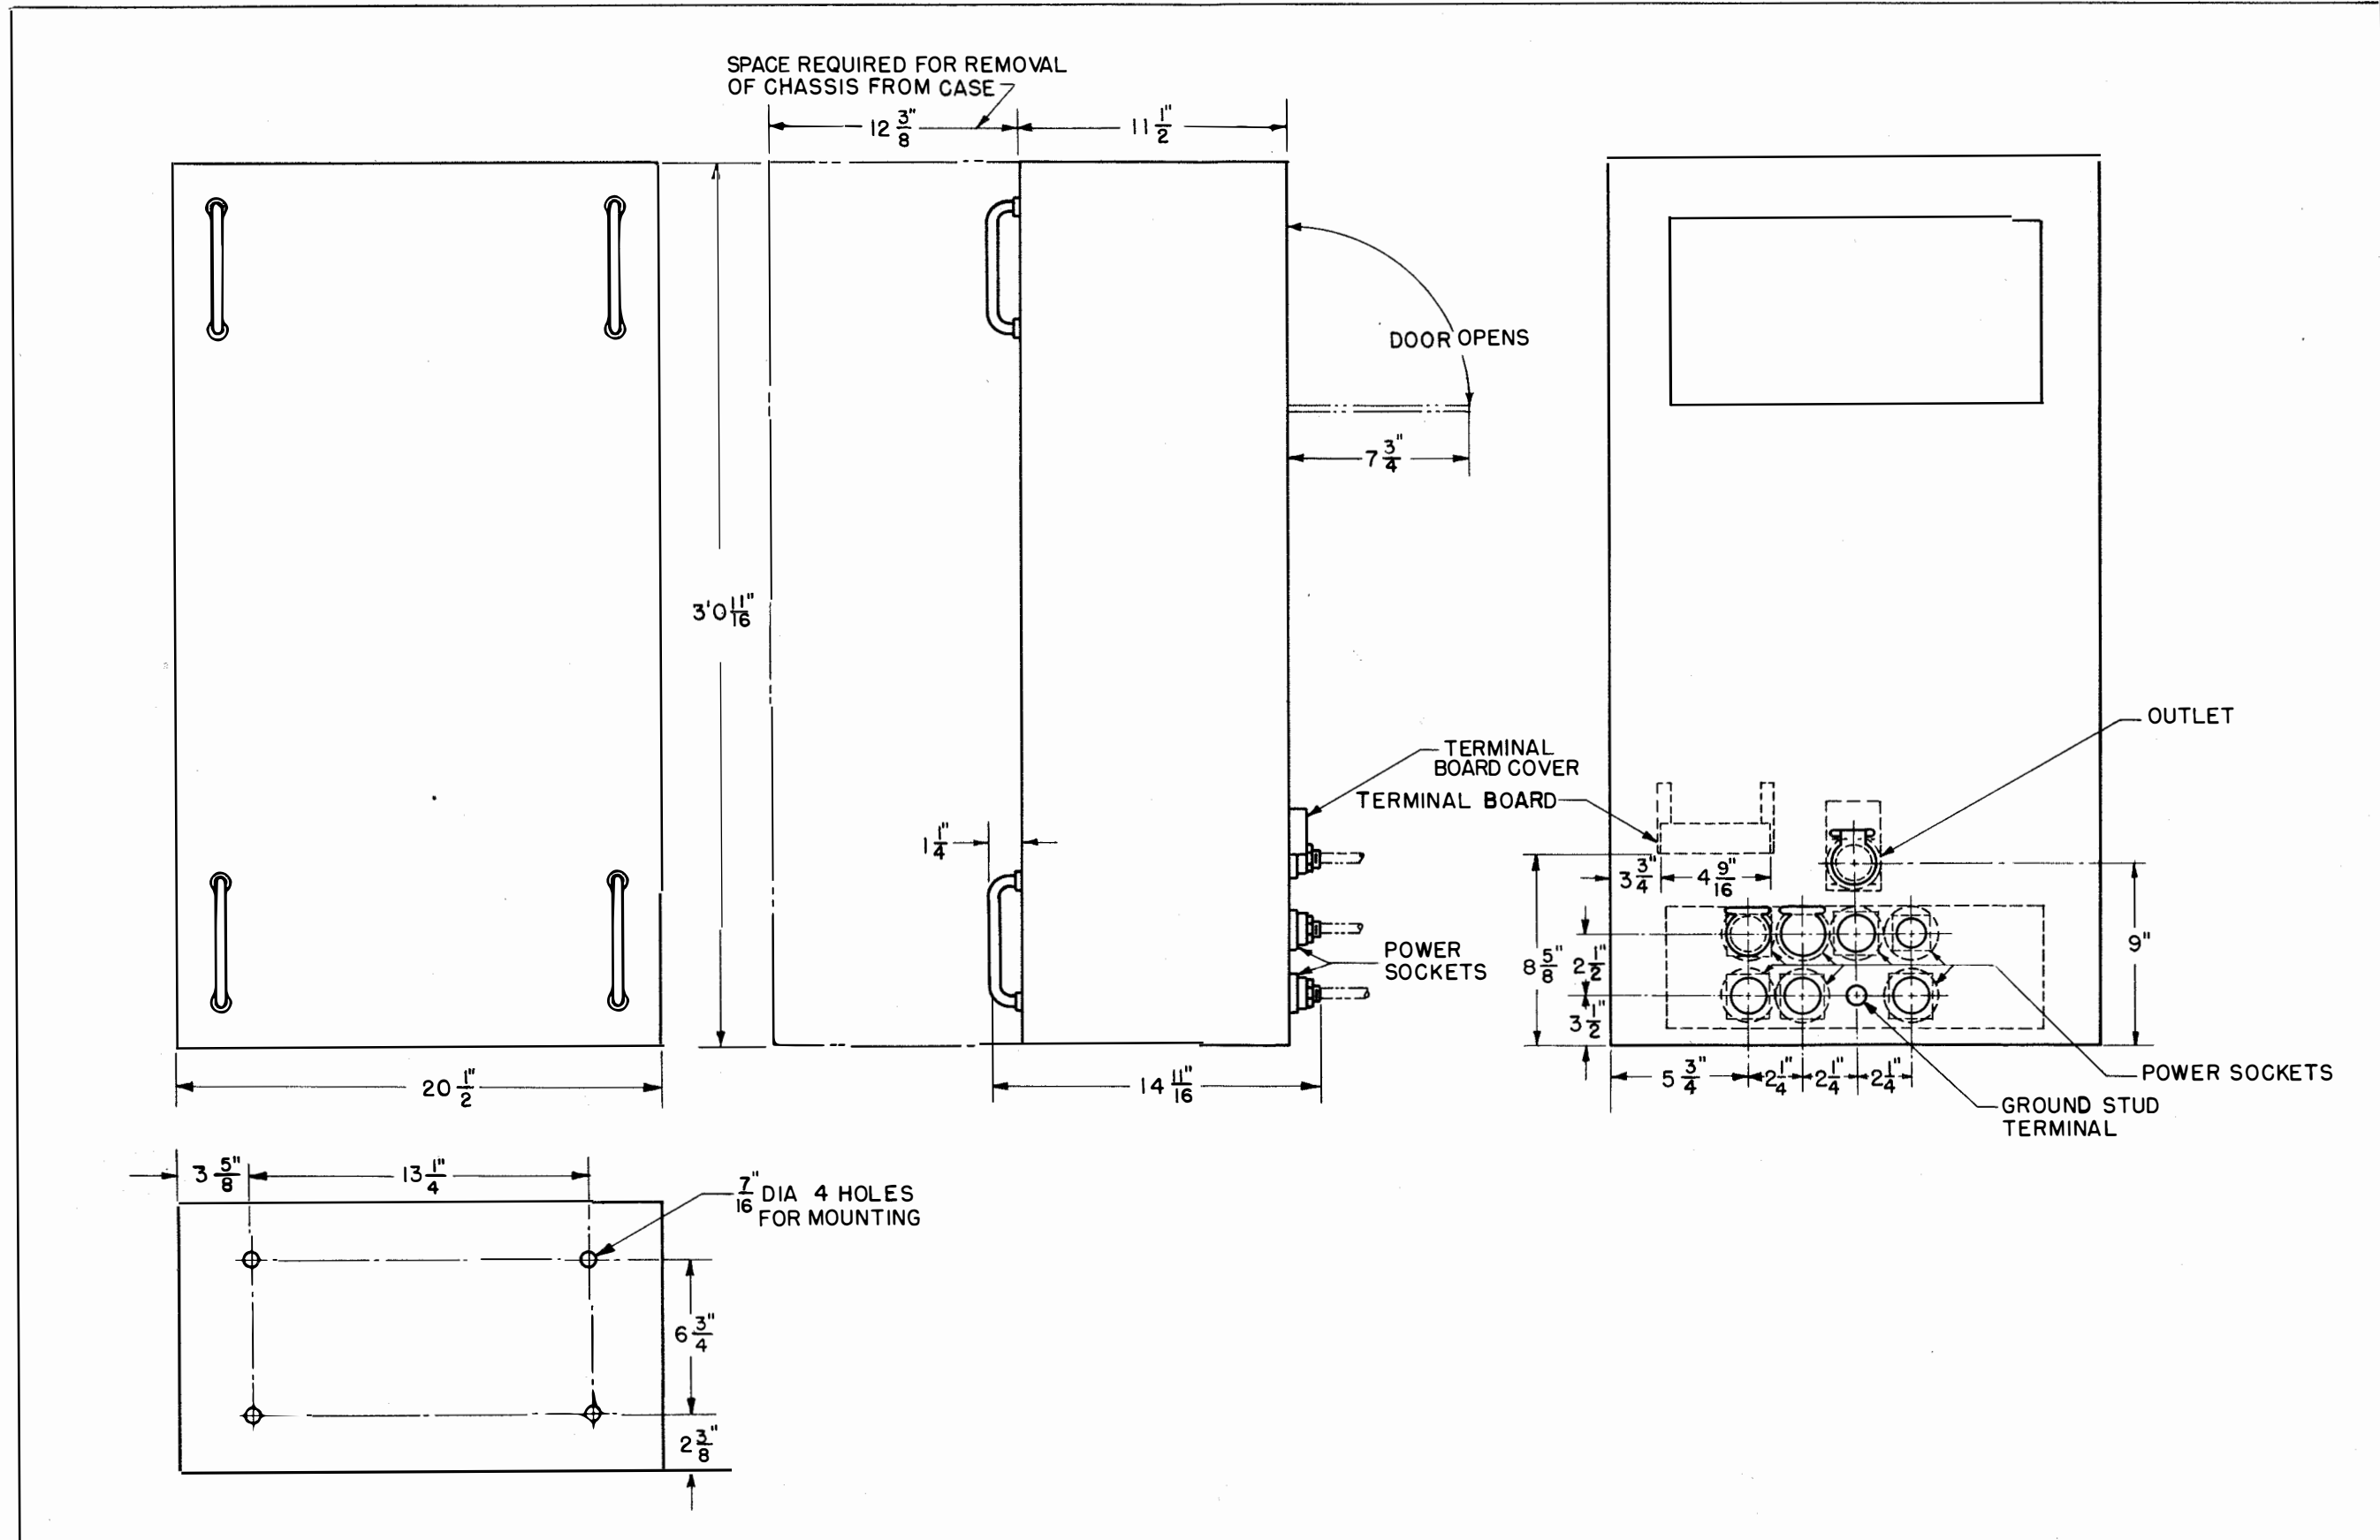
Outline Drawing, Rectifier Navy Type CG-2012
